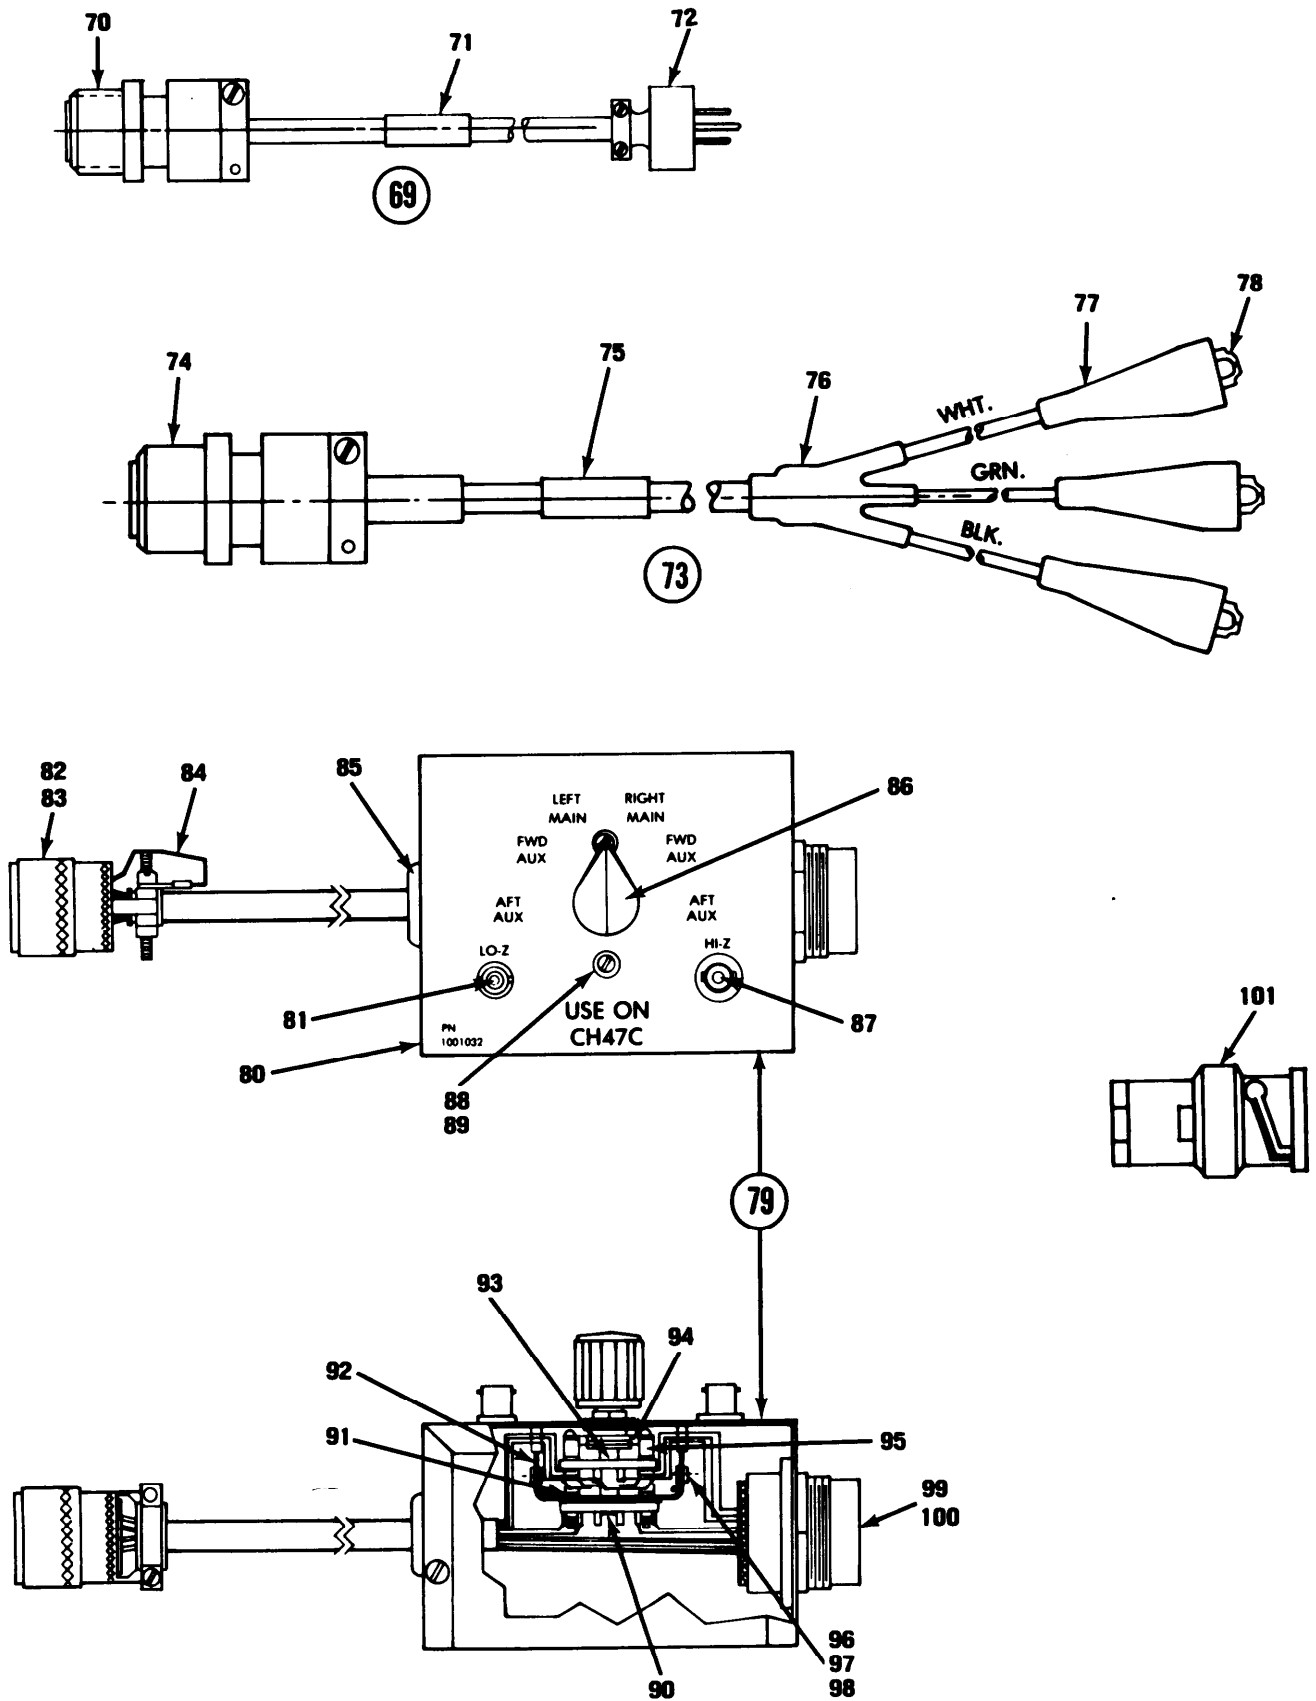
Cables, Adapter Cables and Accessories (Sheet 3 of 3)
